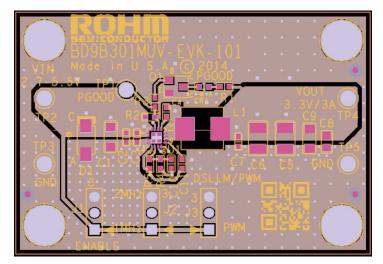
BD9B301MUV-EVK-101 Board PCB layout
